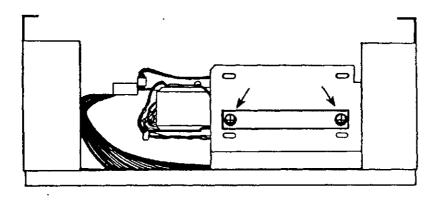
B: MD II - Revision B and C Chassis - Drive Removal
